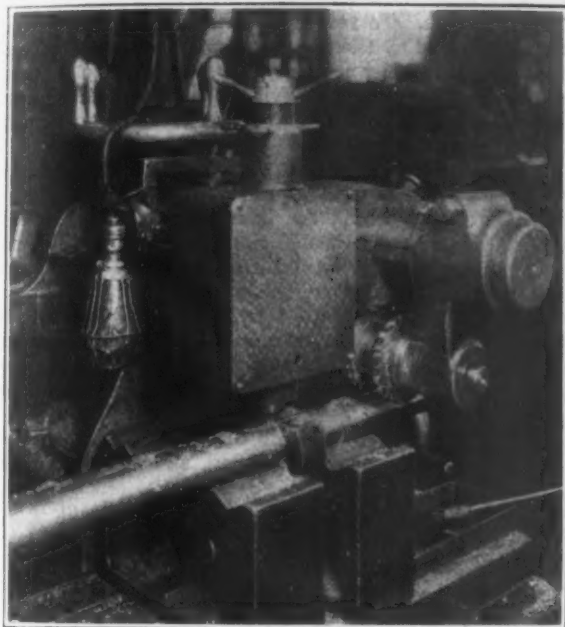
A Combined Milling Operation to Mill Keyways and Square the Ends Is Accomplished in a Standard Horizontal Milling Machine Equipped With Vertical Attachment
